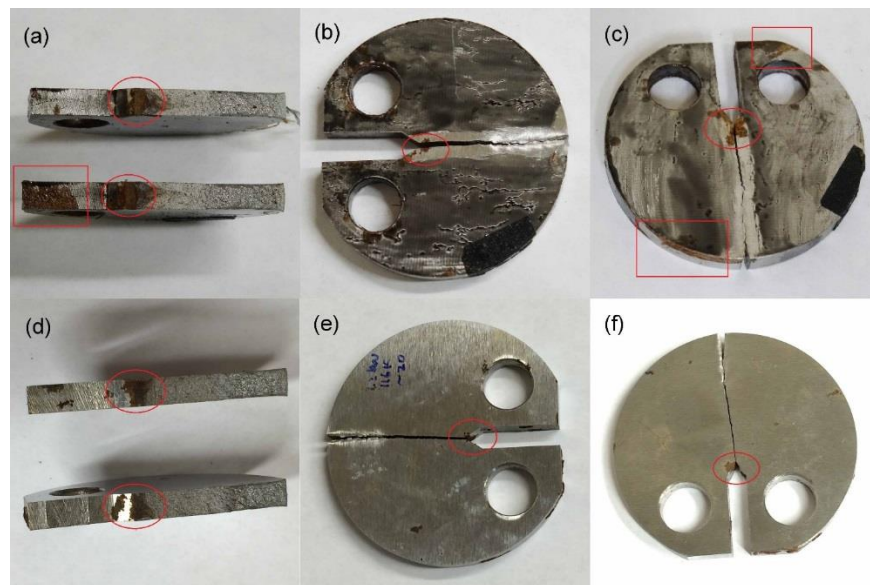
Two types of coating are used on rebar disks exposed to 2 mA to accelerate corrosion: the specimen coated by rust preventative, (a), fracture view, (b), top view, (c), rear view; the specimen coated by high vacuum grease, (d), fracture view, (e), top view, (f), front view.
